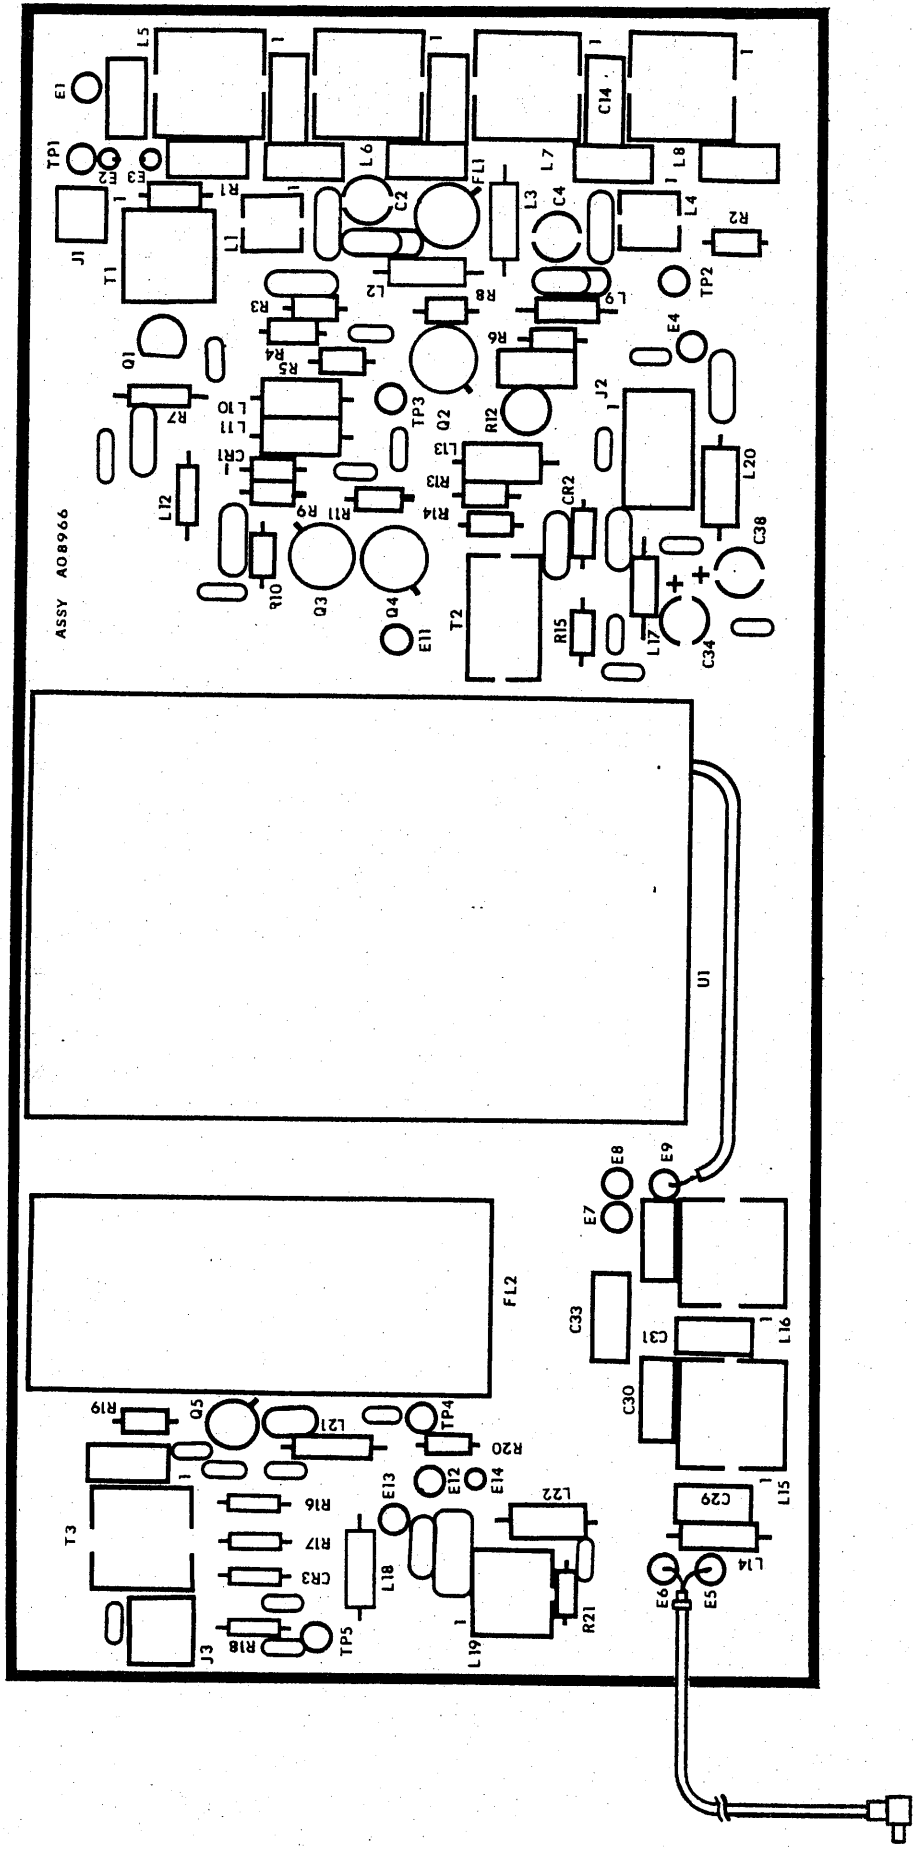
1st Mixer Circuit Card Assembly (A2)
